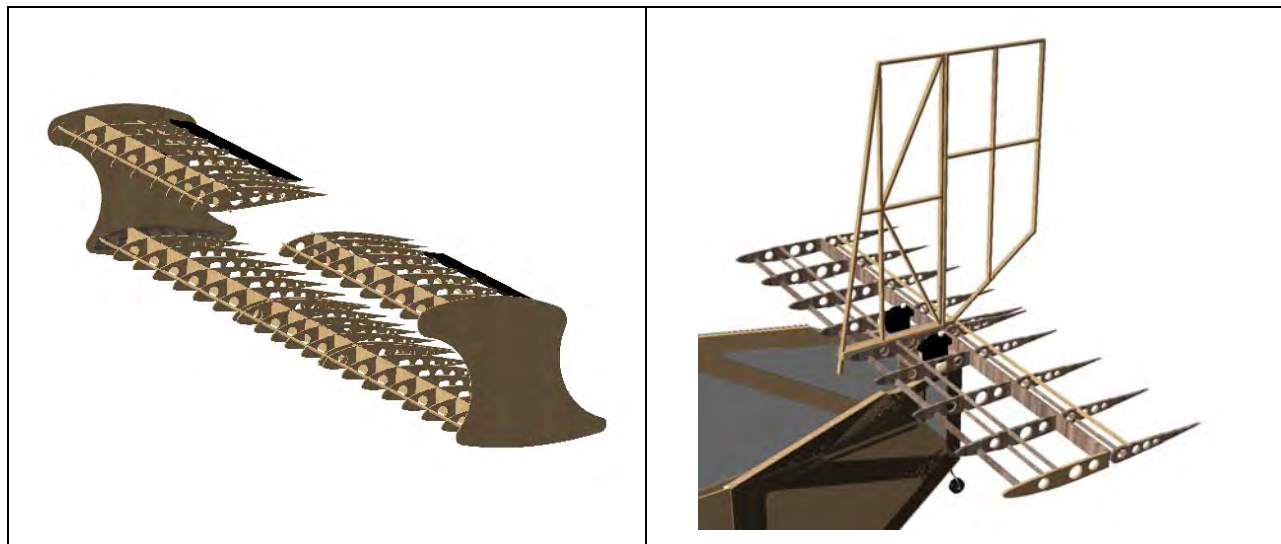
Structural Layout of (a) Wings and (b) Empennage
